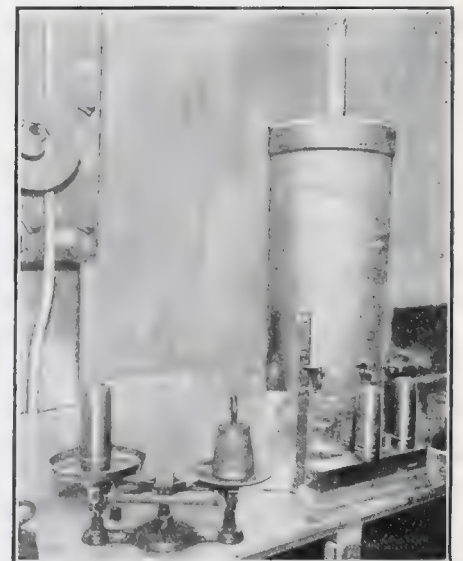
RESIN MELTING FURNACE SHOWING SHELL FILLING AND WEIGHING ARRANGEMENTS.
